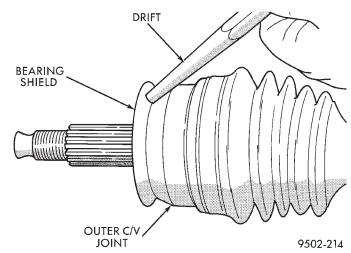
Removing Bearing Shield from Outer C/V Joint
